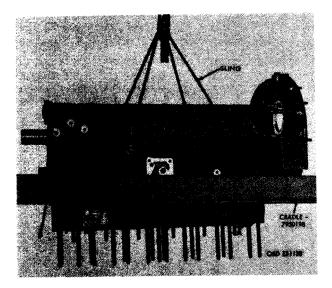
REMOVING STRIPPED ENGINE FROM OVERHAUL STAND.
